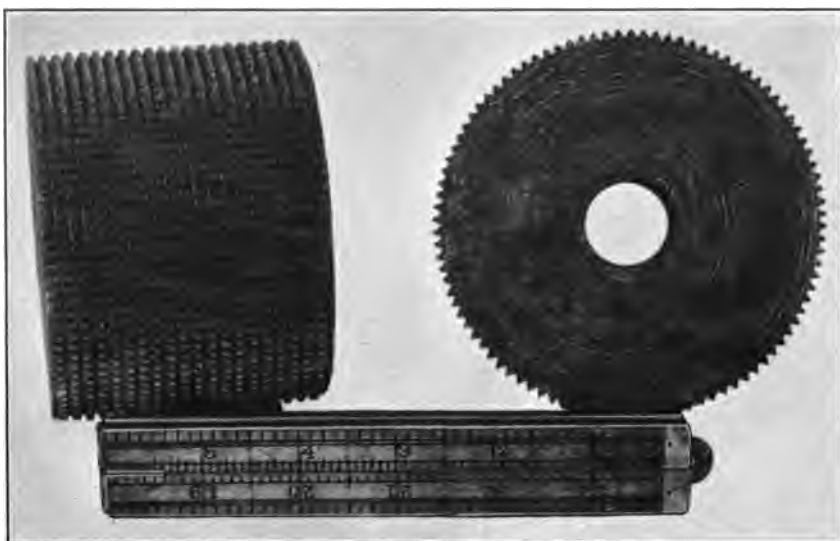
DIAMOND-POINT BURR, EIGHT TO THE INCH.
